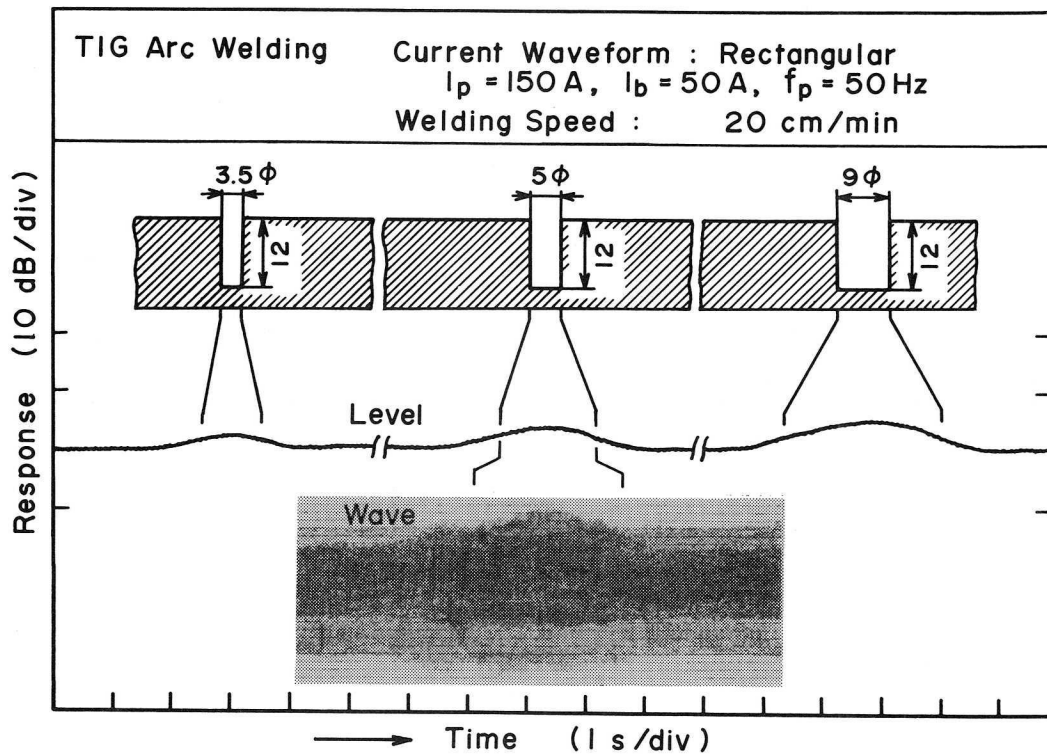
Example of hole detected by arc sound in TIG arc welding.
